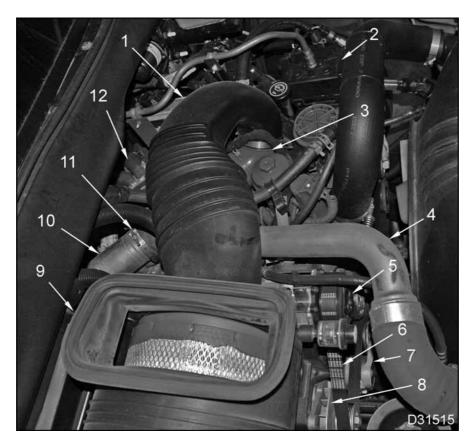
Parts for removal (Engine In-chassis - 4100 truck)
